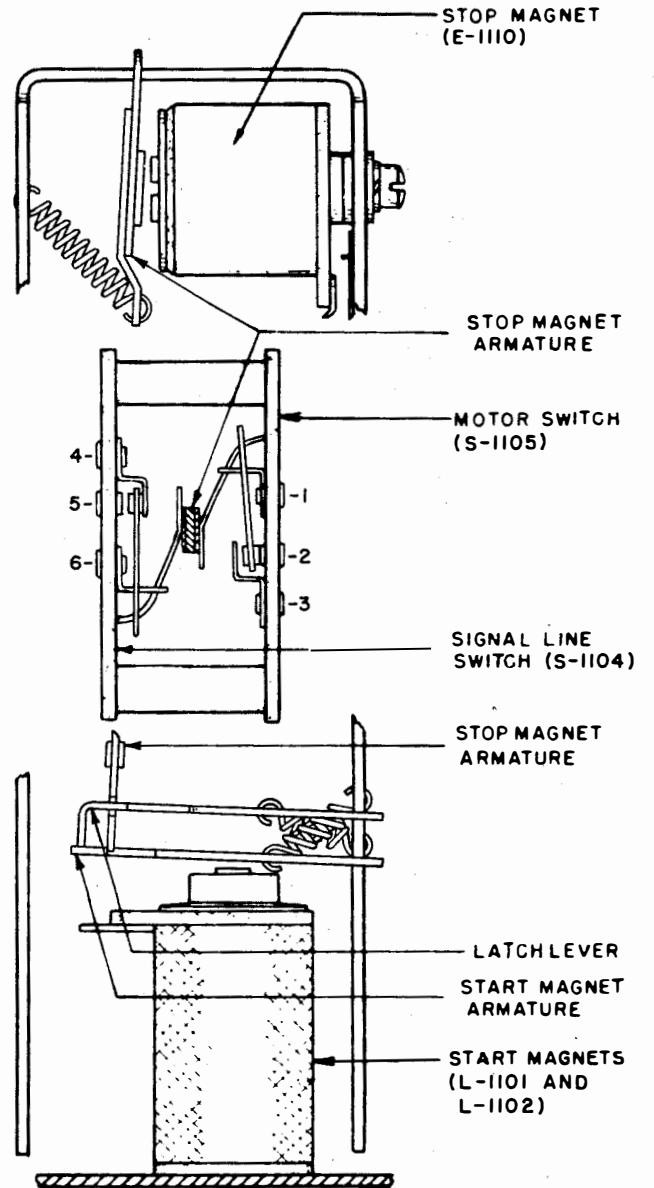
Electrical Motor Control Mechanism, Start Position
